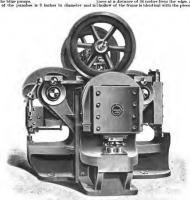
COMBINED PUNCHING AND SHEARING MACHINE,
